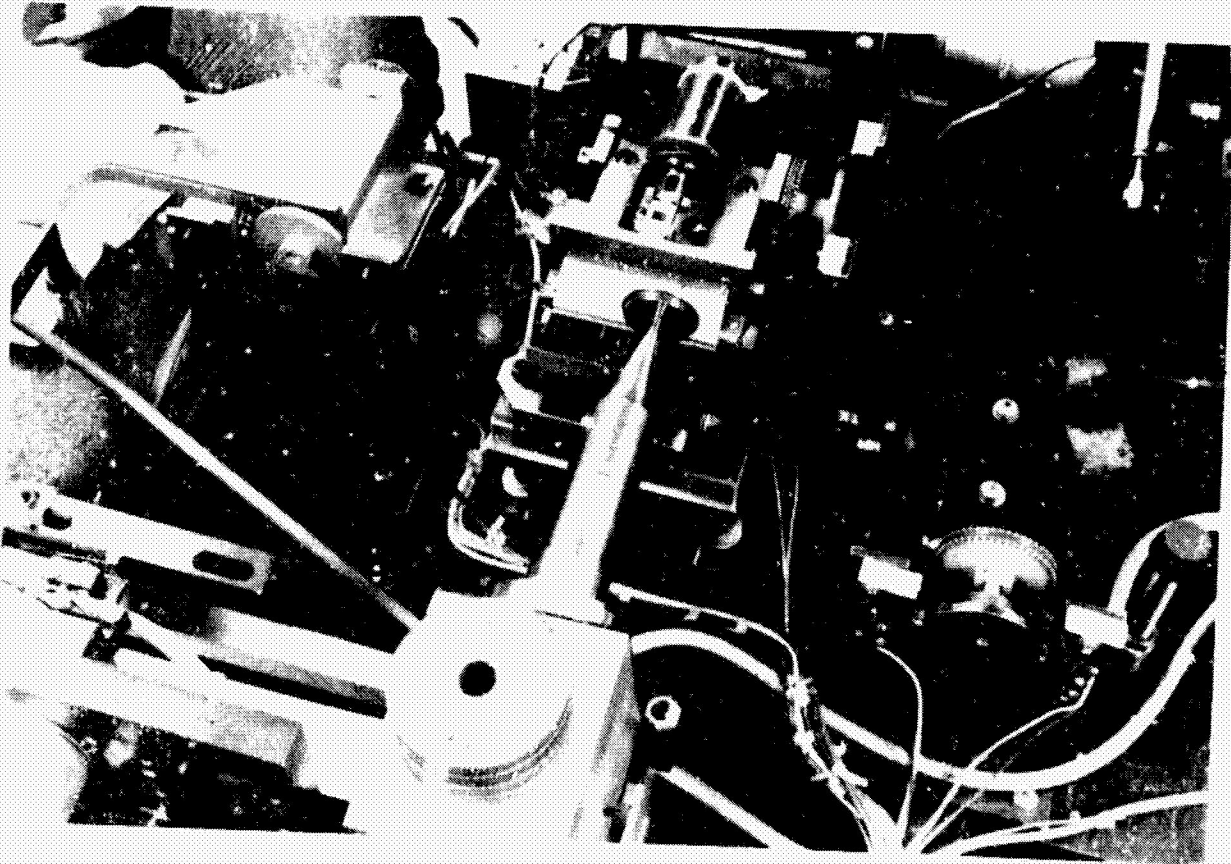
Schematic Drawing of an Ultrasonic Weld Station
